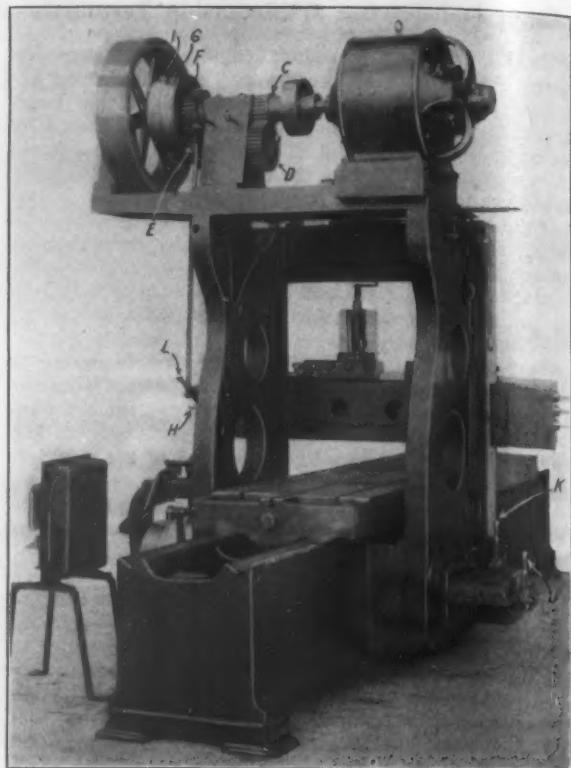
Rear View of the Planer Showing Details of the Drive.
